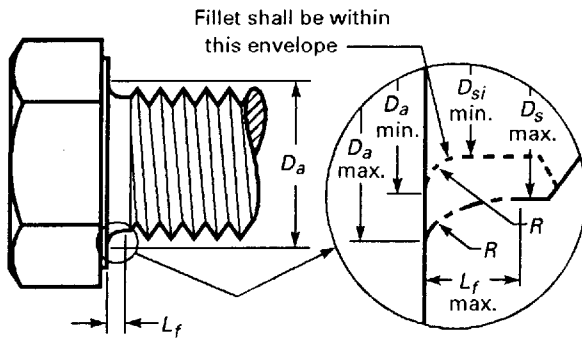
FILLET DETAIL FOR SHORT SCREWS
